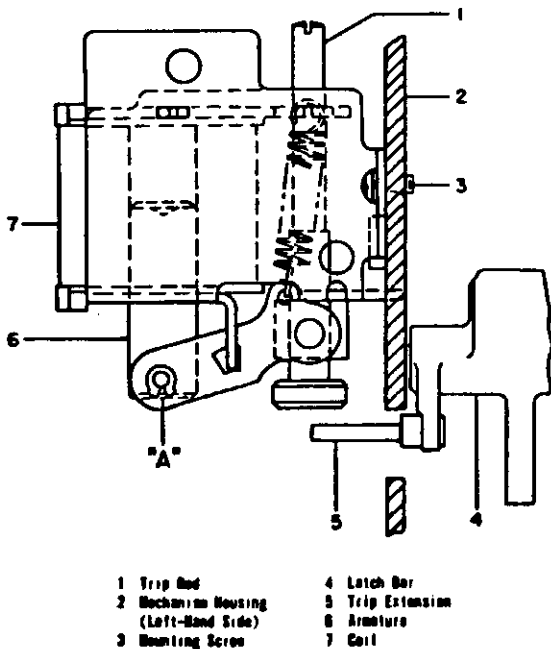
Shunt Trip Device Adjustment Type K-225 thru K-2000, K-1600S and K-2000S Circuit Breakers
